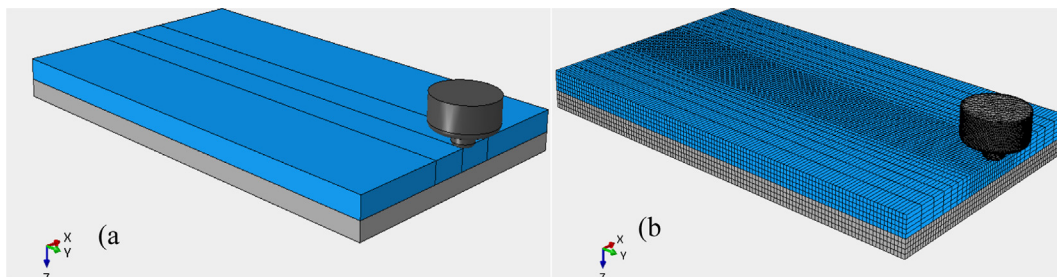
3D model of tool-workpiece assembly (a) Eulerian-Lagrangian assembly (b) mesh.
